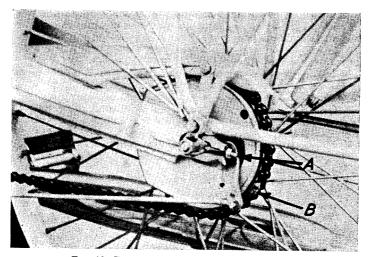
DETAILS OF CHAIN ON REAR SPROCKET
